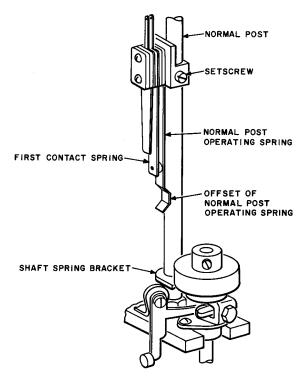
Normal Post Spring Assembly Operated by Straight Shaft Spring Bracket
